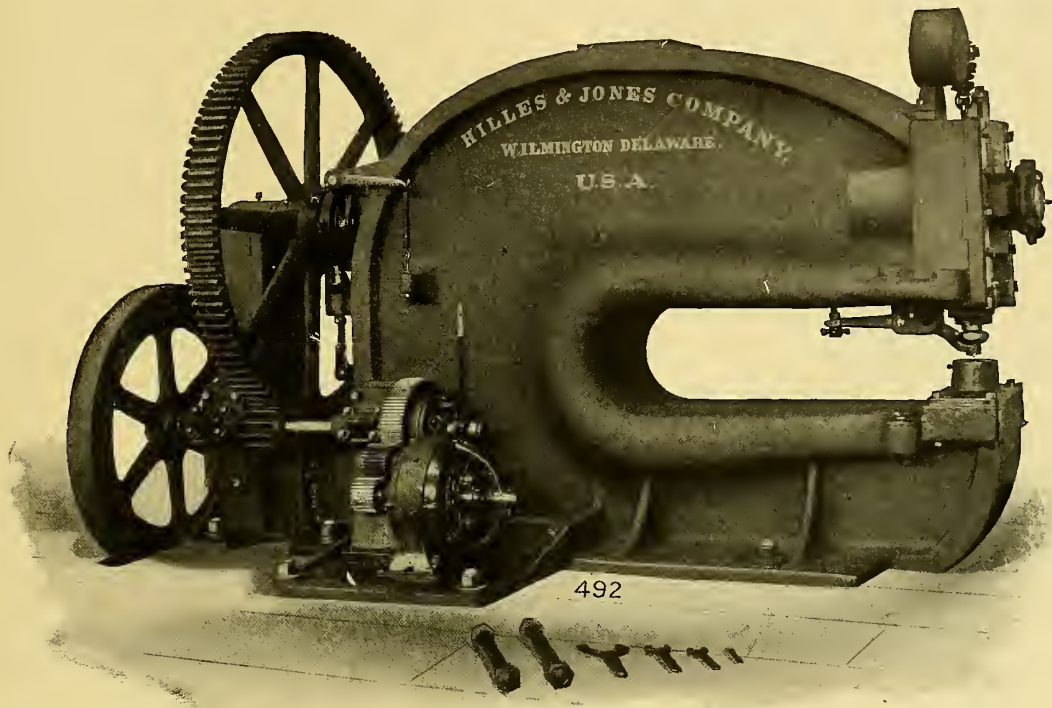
MOTOR-DRIVEN 72-INCH THROAT HILLES & JONES PUNCHING MACHINE.
